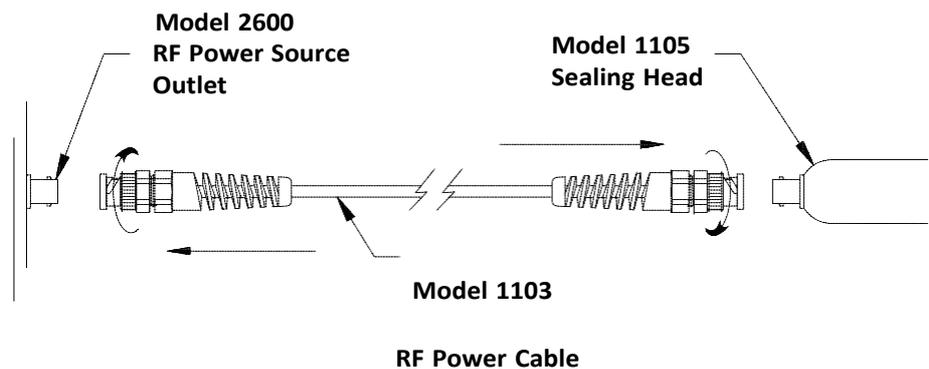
, RF Power Cable Attachment (For Use with a Model 1105)
